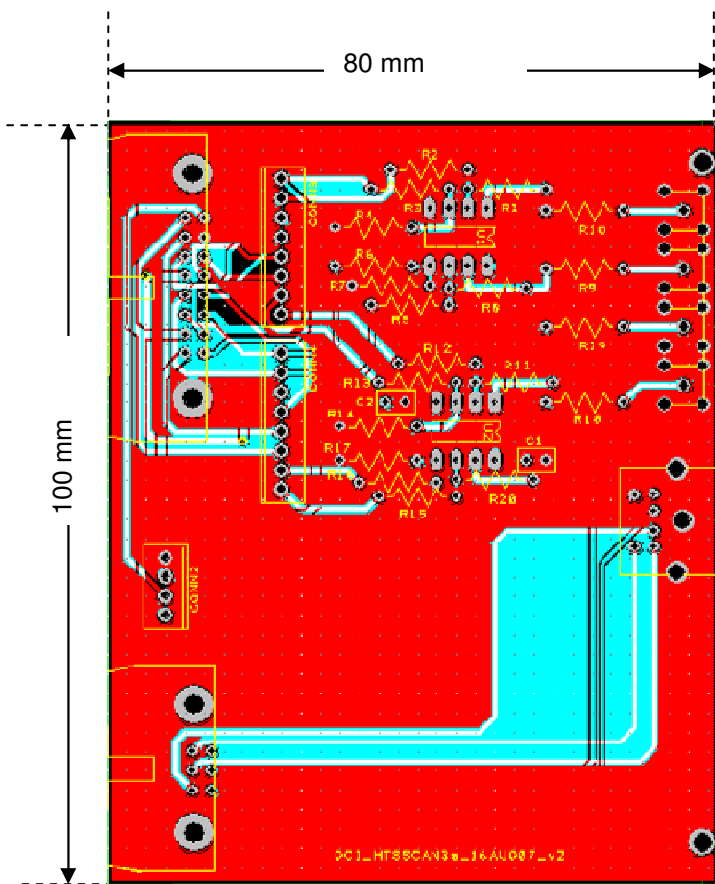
Double-sided printed circuit board layouts of the analogue output board.
